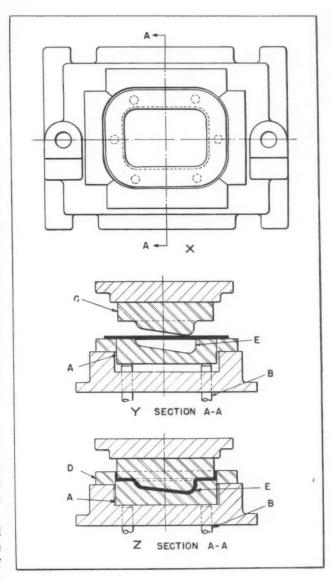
Plan View X and Sectional Views Y and Z Illustrate the Difficulty of Producing a Part of the Type Shown in a Forming Die. The Solid Spanking Action on the Metal Would Cause Wrinkles to Form across the Face of the Part
